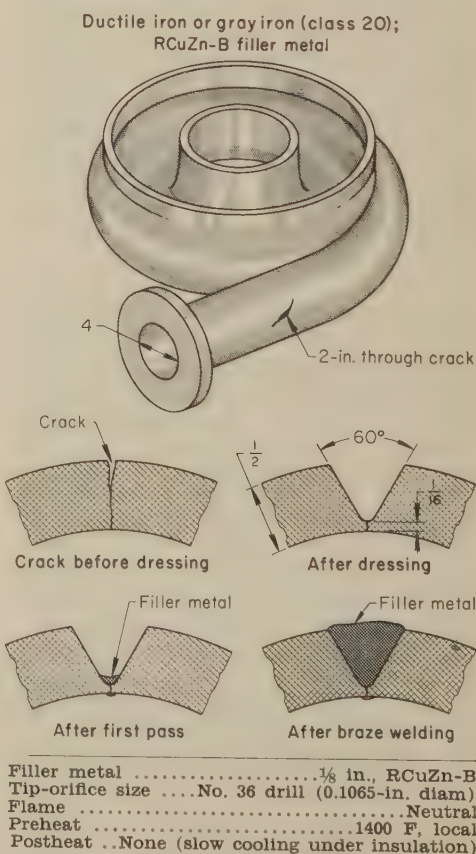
Oil-soaked pump casting in which a crack was repaired by braze welding (Example 527)
